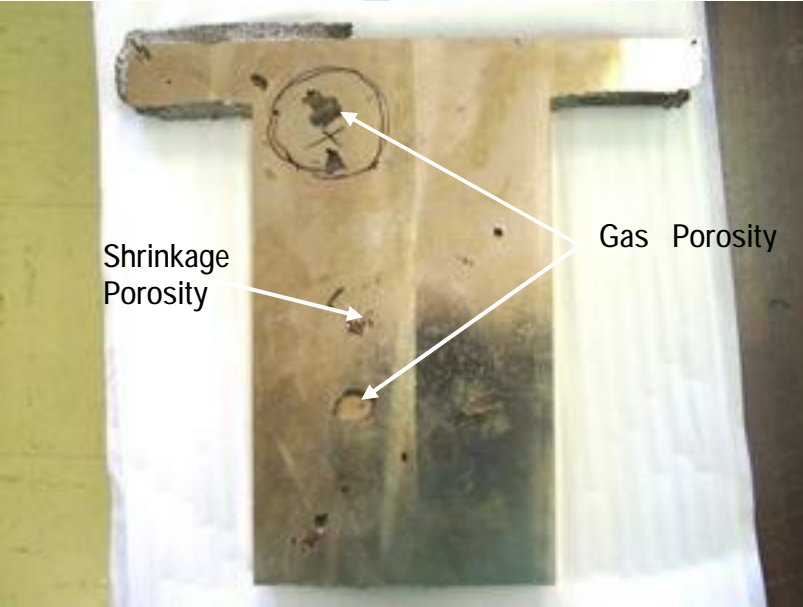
Machined as-cast anode showing shrinkage and gas porosities
